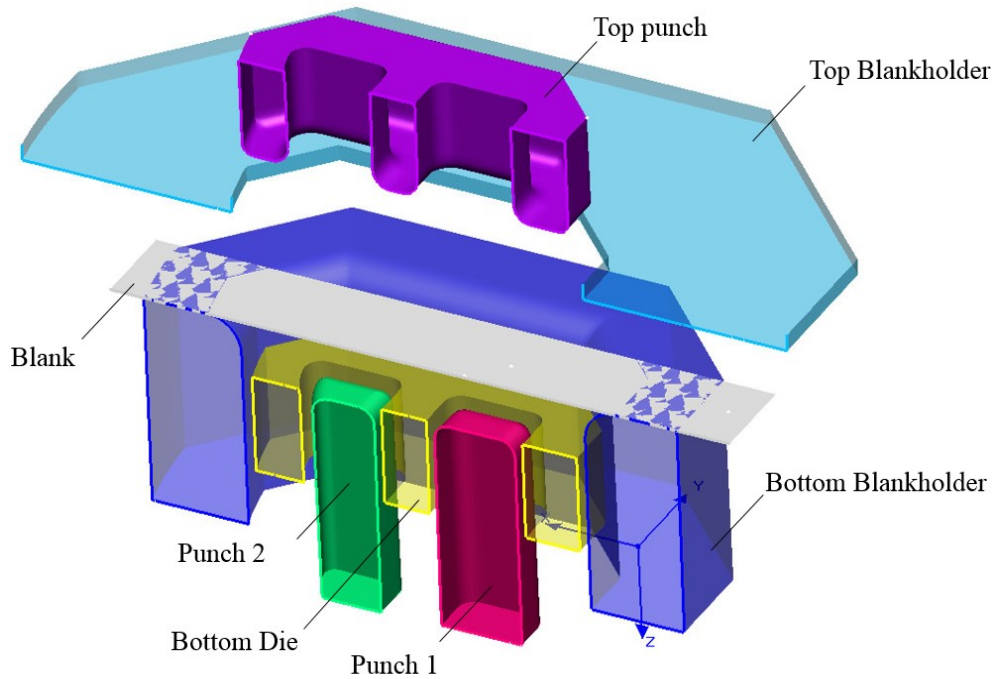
Section view of assembled forming tools for forming AA2060 wing stiffener component.
